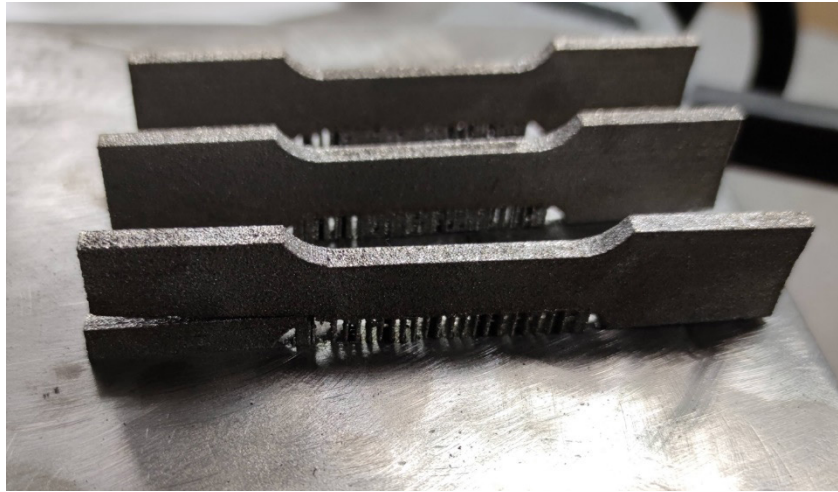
3D printed tests specimens comprising supports as well as illustrating a printing defect – delayering in the forefront specimen.
